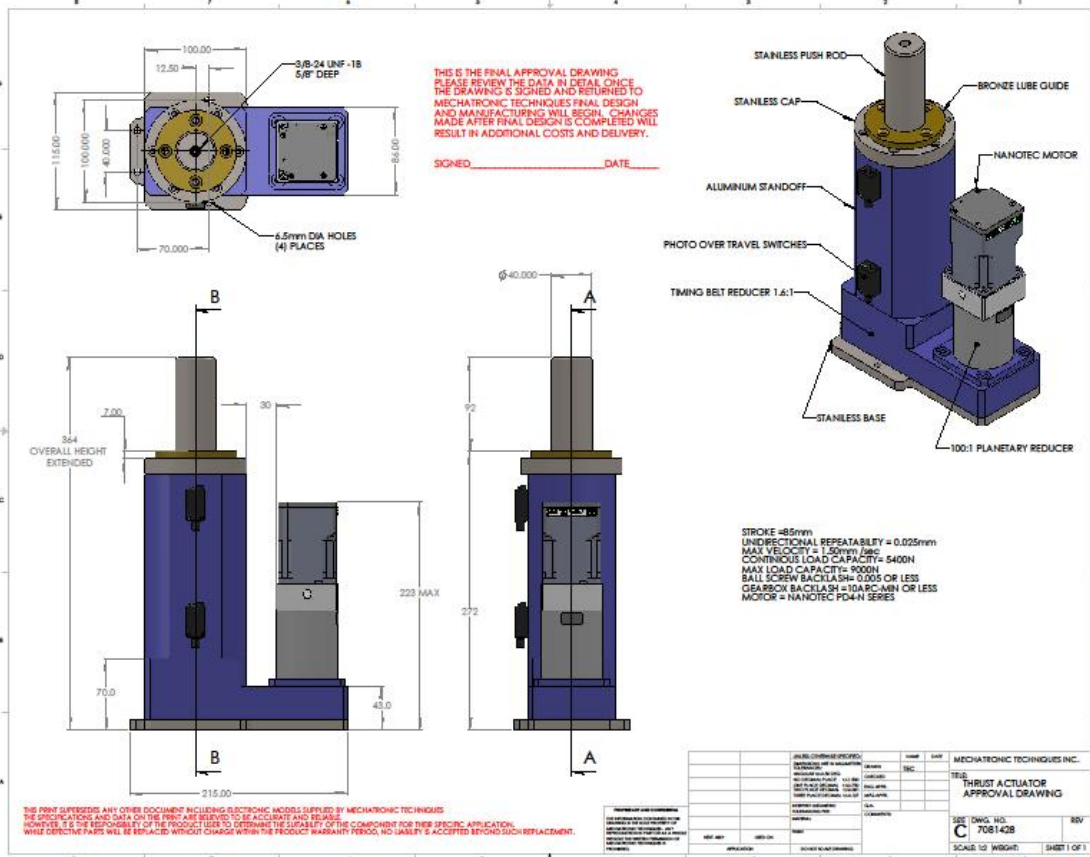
Approval drawing for custom spindle drive actuator for MaTMeCh apparatus.
